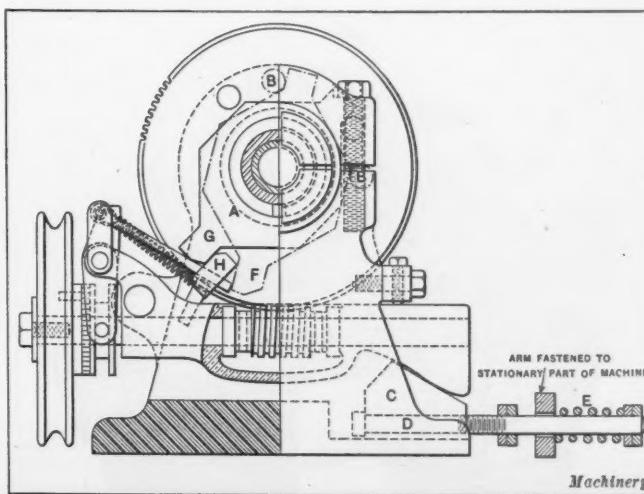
Mechanism of Semi-automatic Thread Milling Attachment shown on a Milling Machine in Fig. 28
